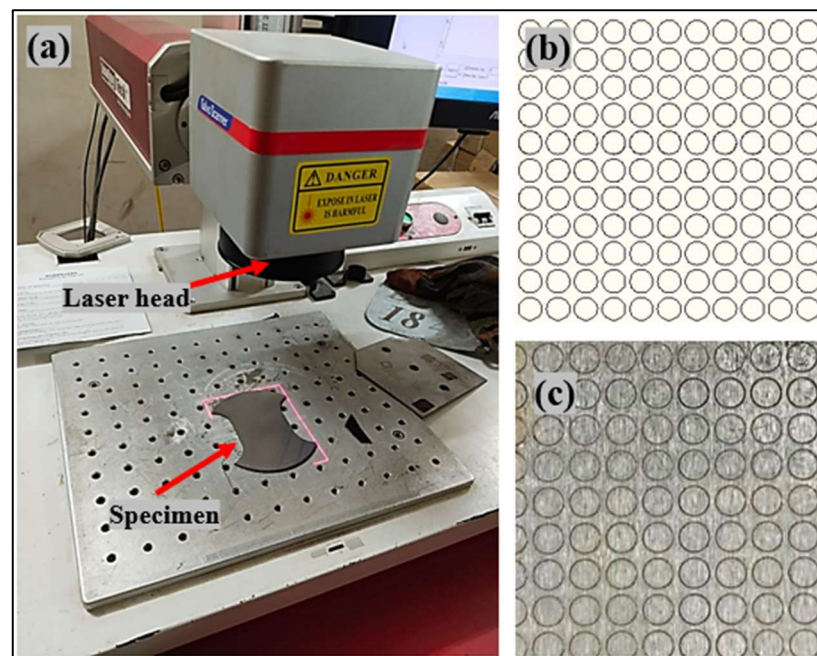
(a) Laser marking in progress with 20W laser head, (b) CAD grid pattern of 2.5mm diameter circles, and (c) laser-marked pattern on clad specimen
